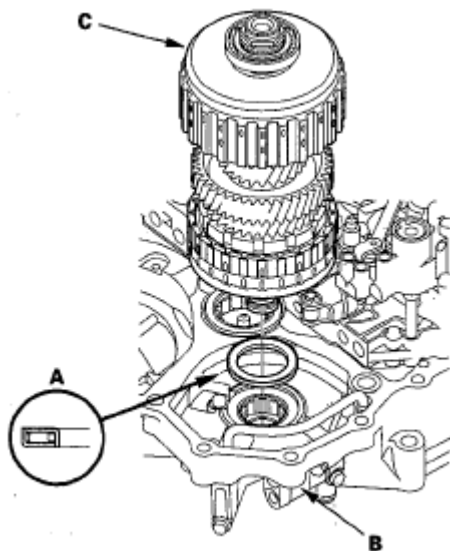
Identifying Thrust Needle Bearing And Secondary Shaft Assembly
